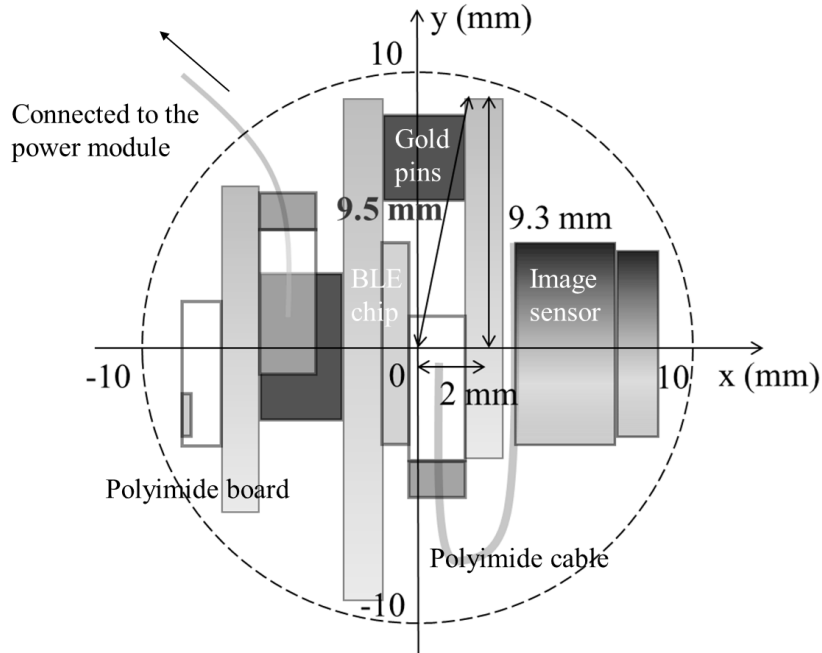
Schematically drawn PCBs of the implantable camera, which were stacked for three-layered structure to be packaged in a spherical form.
